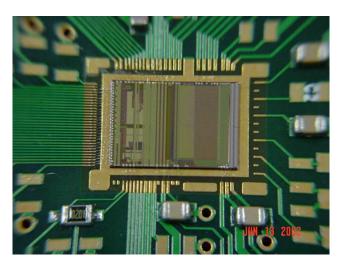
The photograph of the prototype SVX4 chip mounted on chip carrier board.
